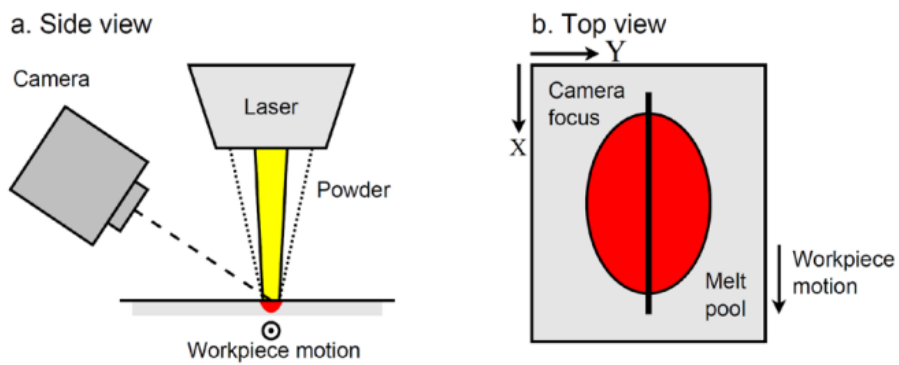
Side view (a) and top view (b) of longitudinal laser cladding [34].
